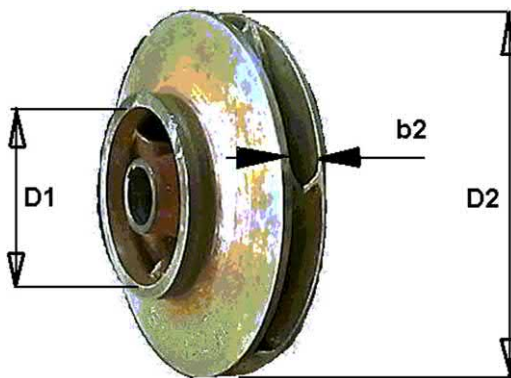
Illustrating the three key impeller geometry dimensions. As shown here, the impeller rim is machined cylindrically. In other versions the rim is machined to a conic profile.
